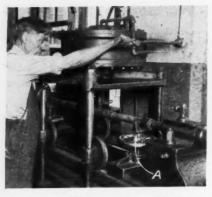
Straightening rough crankshafts for Gordon printing presses.
